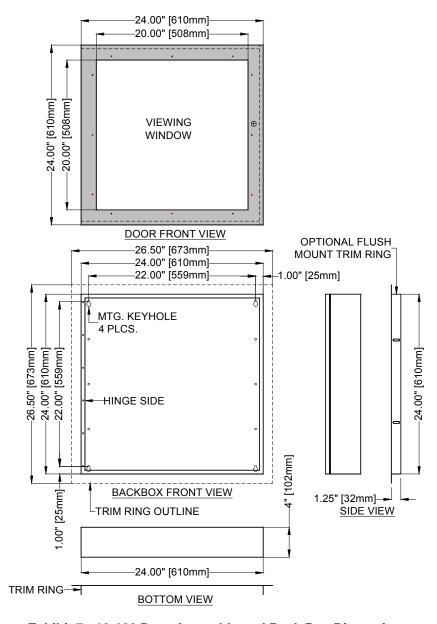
10-122 Door Assembly and Back Box Dimensions
